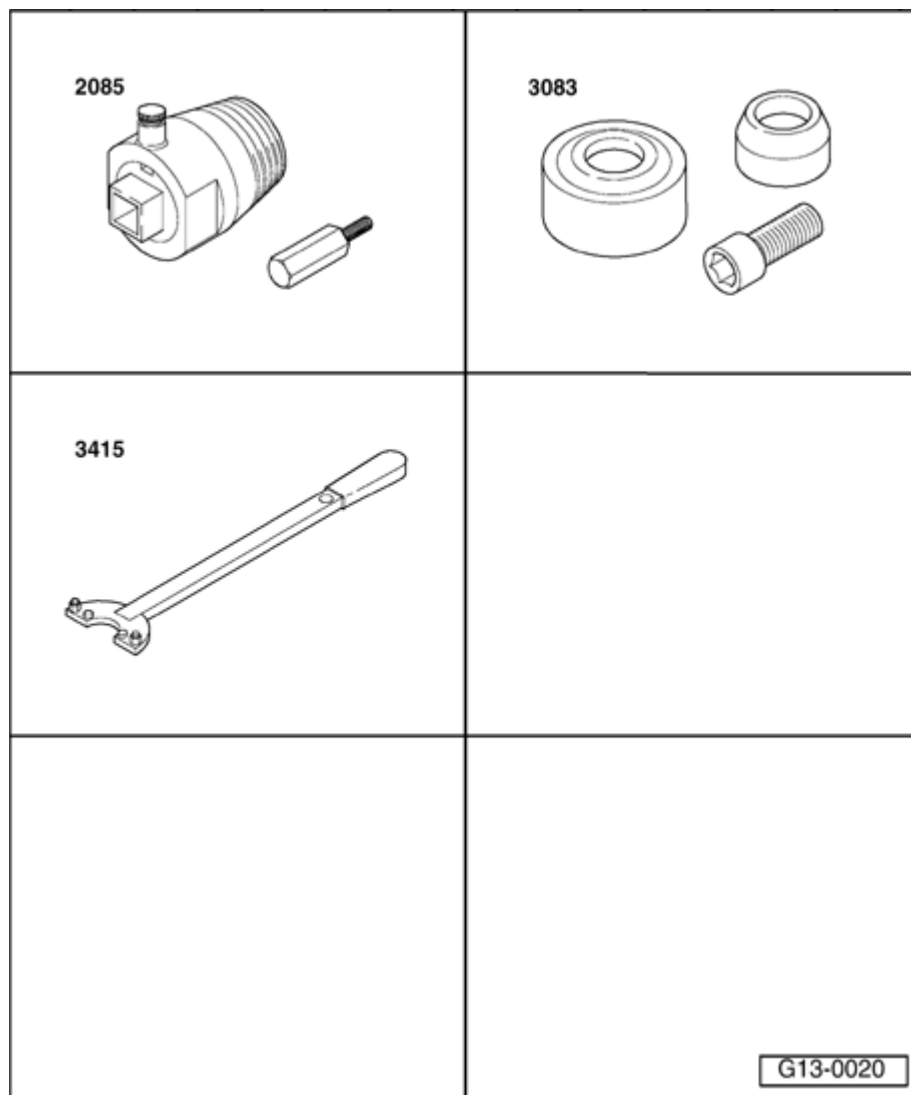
Identifying Special Tools - Crankshaft Oil Seal - Pulley End, Replacing
